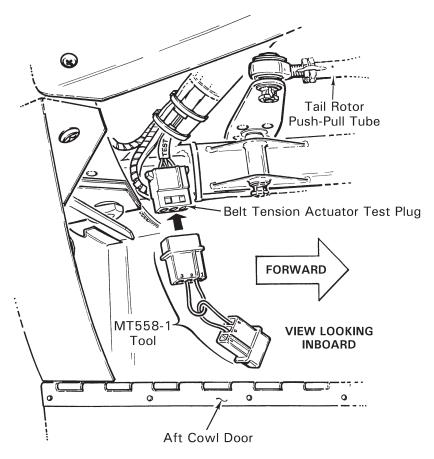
MT558-1 TOOL INSTALLATION
